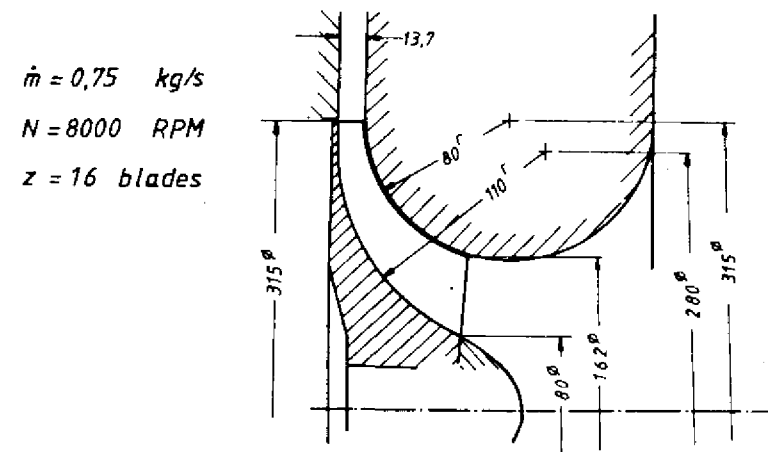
Geometry and main dimensions of the RWTH radial compressor
